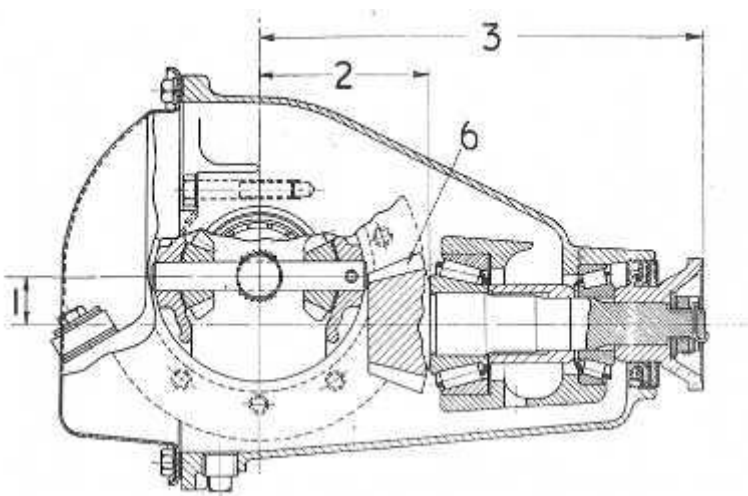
To determine the distance from the carrier center to the bearing-contact surface of the pinion gear.
